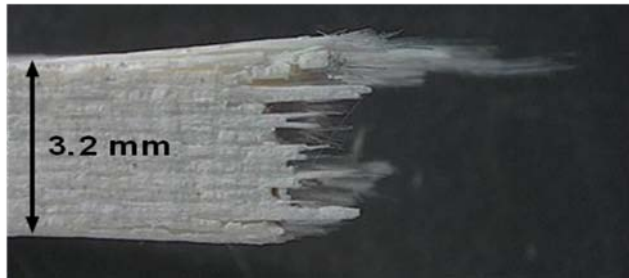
Fracture surface of the N720/AM specimen(2) tested in tension to failure with constant loading rate of 25MPa at 1100°C in steam (side view).
